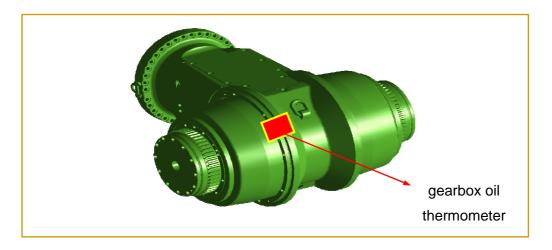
Cutter head gearbox, 3D - Illustration.
